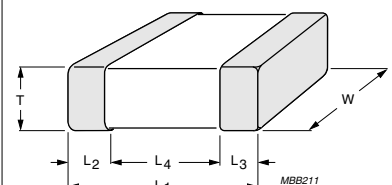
Surface mounted multilayer ceramic capacitor dimension
